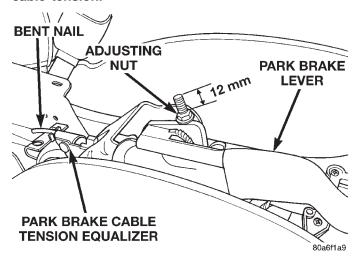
Parking Brake Adjustment (Rear Drum Brakes)
